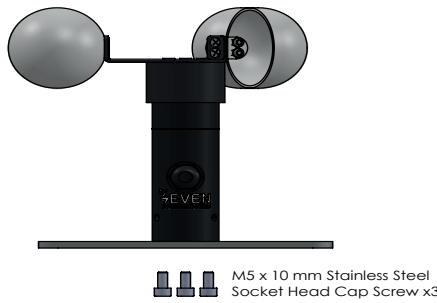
Plastic Wind Speed Sensor Pipe Mounting
